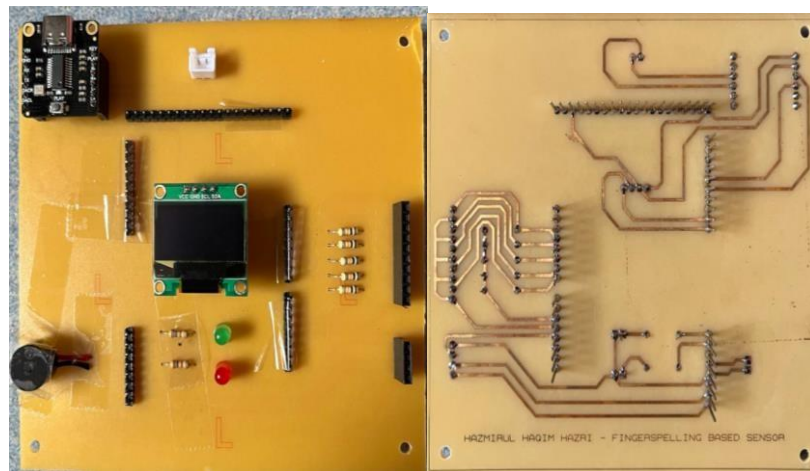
Complete Printed Circuit Board Design (PCB).
